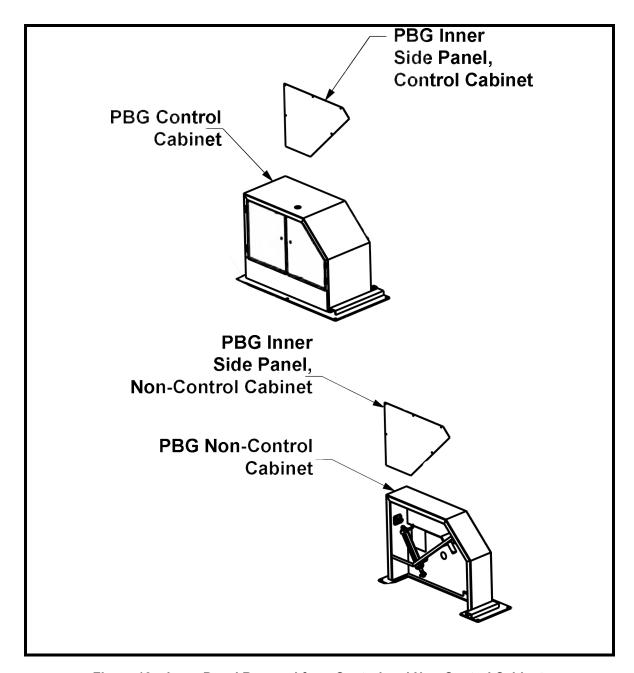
Inner Panel Removal from Control and Non-Control Cabinets
